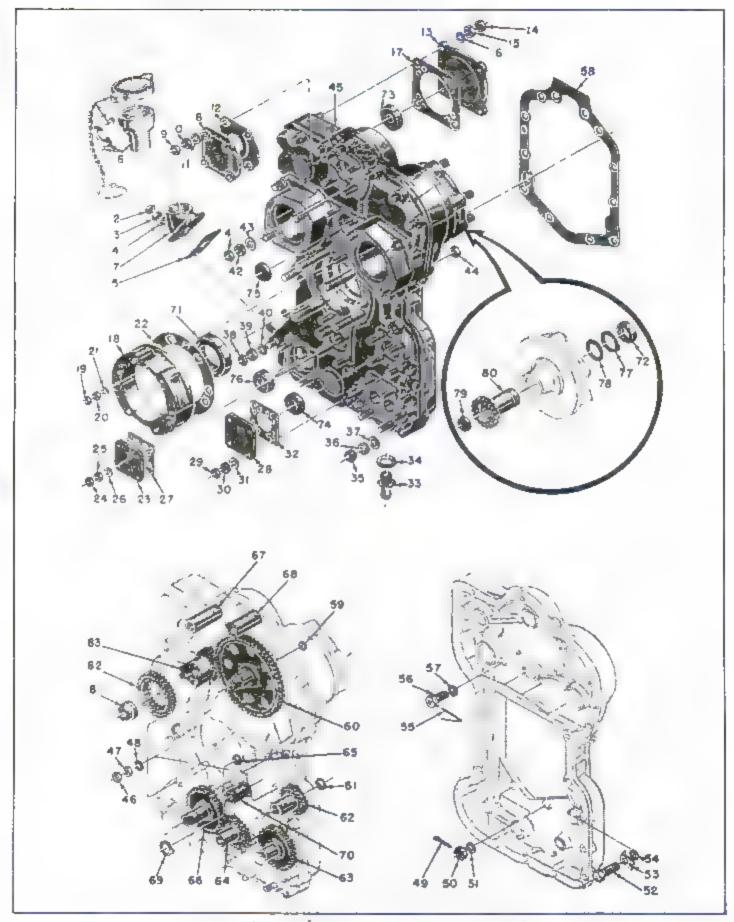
View of Accessory Cose (Sheet 2 of 2)
